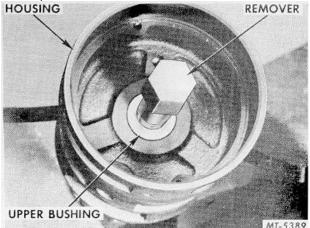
Installing Remover SE-1955-5 In Upper Bushing
